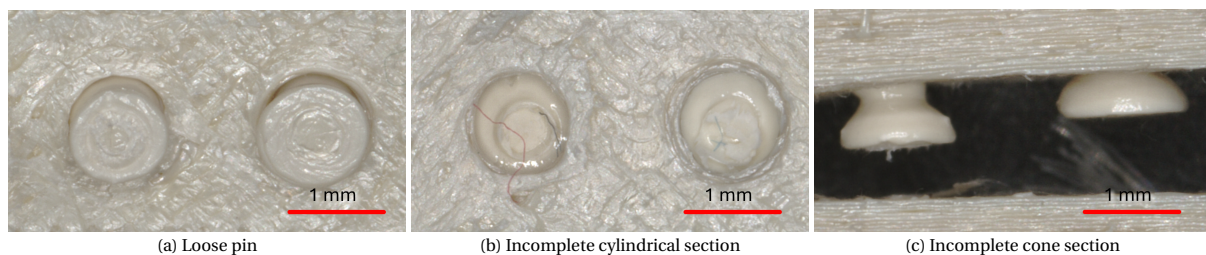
Examples of incomplete pin formation from preliminary testing. (a) Shows a fracture surface with a loose pin due to insufficient filling of the cavity. (b) Highlights the incomplete formation of the pin cylindrical section, causing fastener failure. (c) Displays irregular cone sections, deviating from the intended geometry; the compromised mechanical interlocking results in pullout failure.
